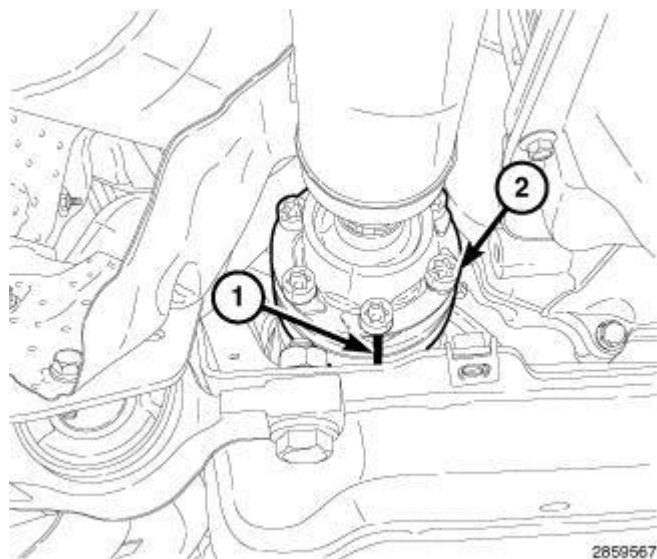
C/V Joint Retaining Bolts & Reference Line
